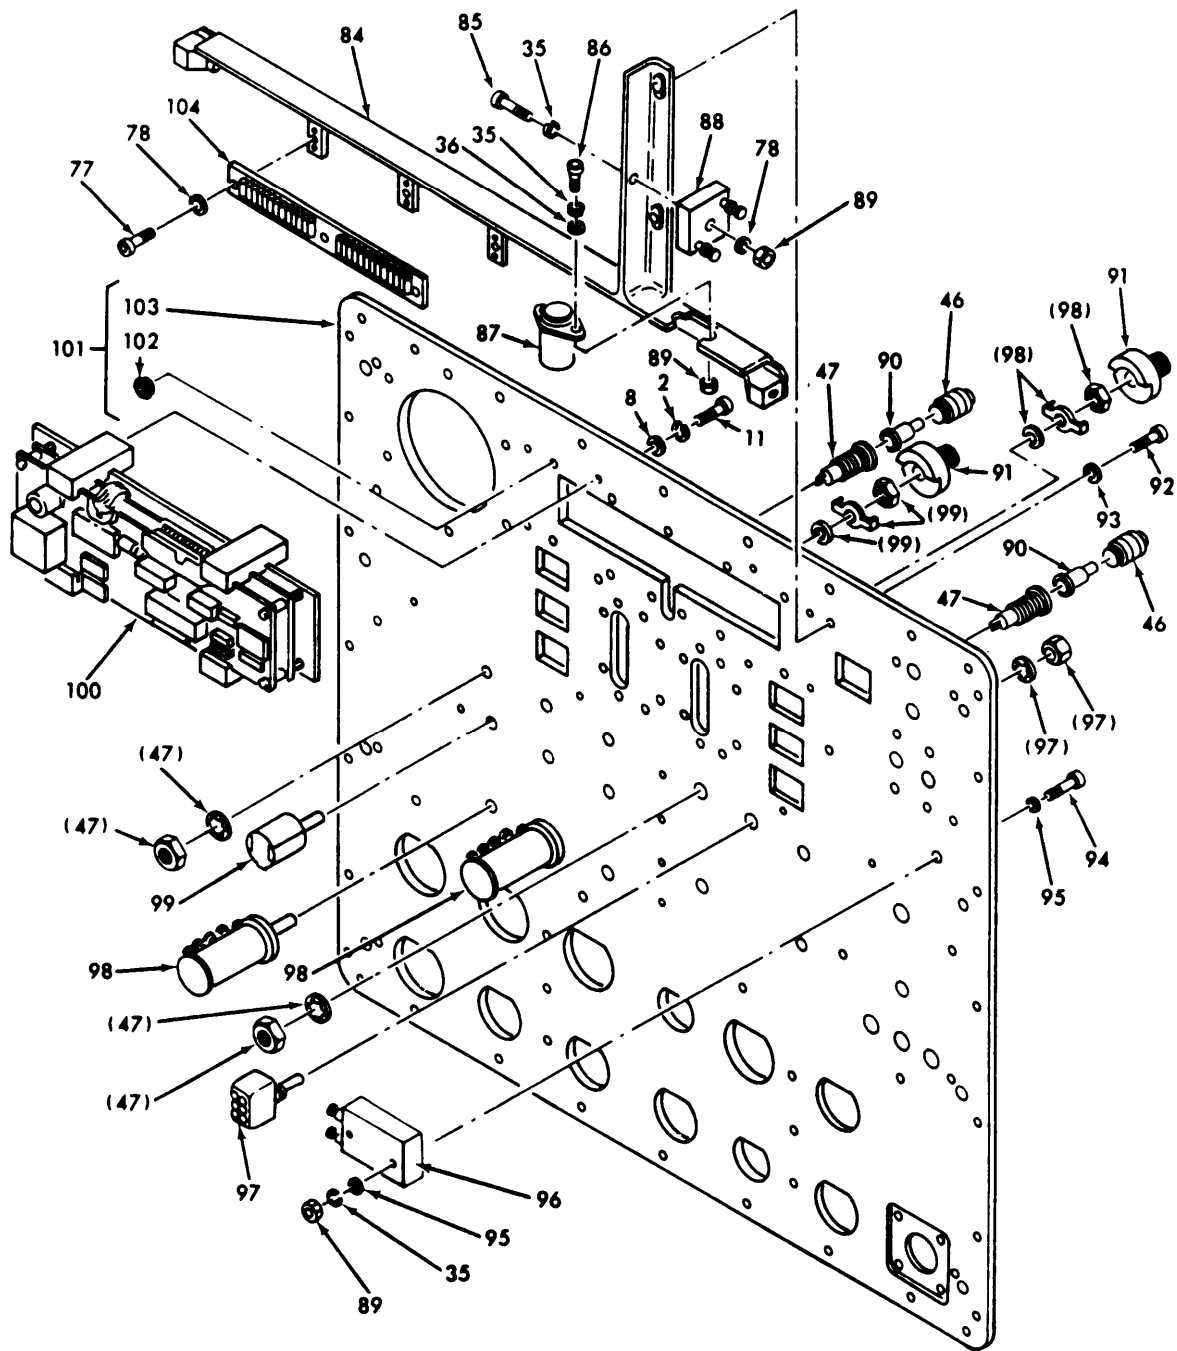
PANEL ASSEMBLY A1 COMPONENT PARTS
